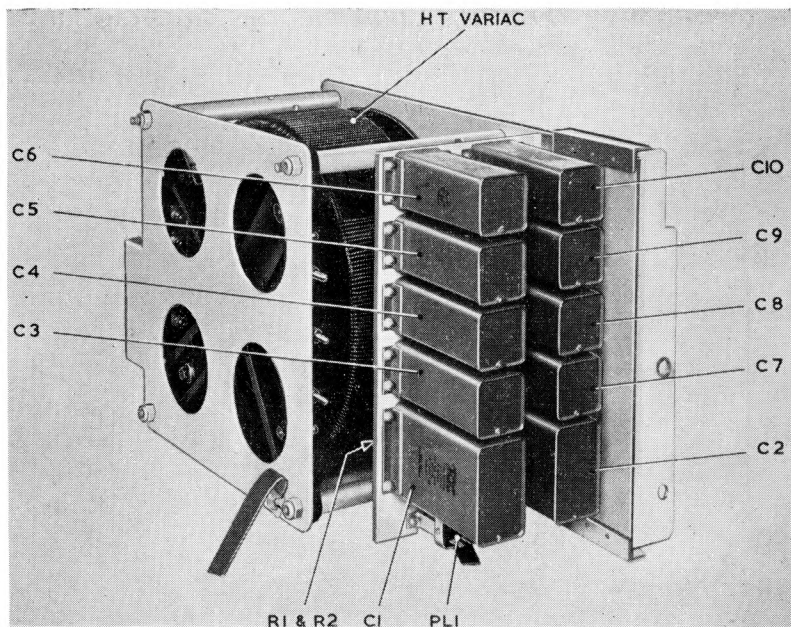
Transformer unit Type 174 (showing capacitor assembly)
